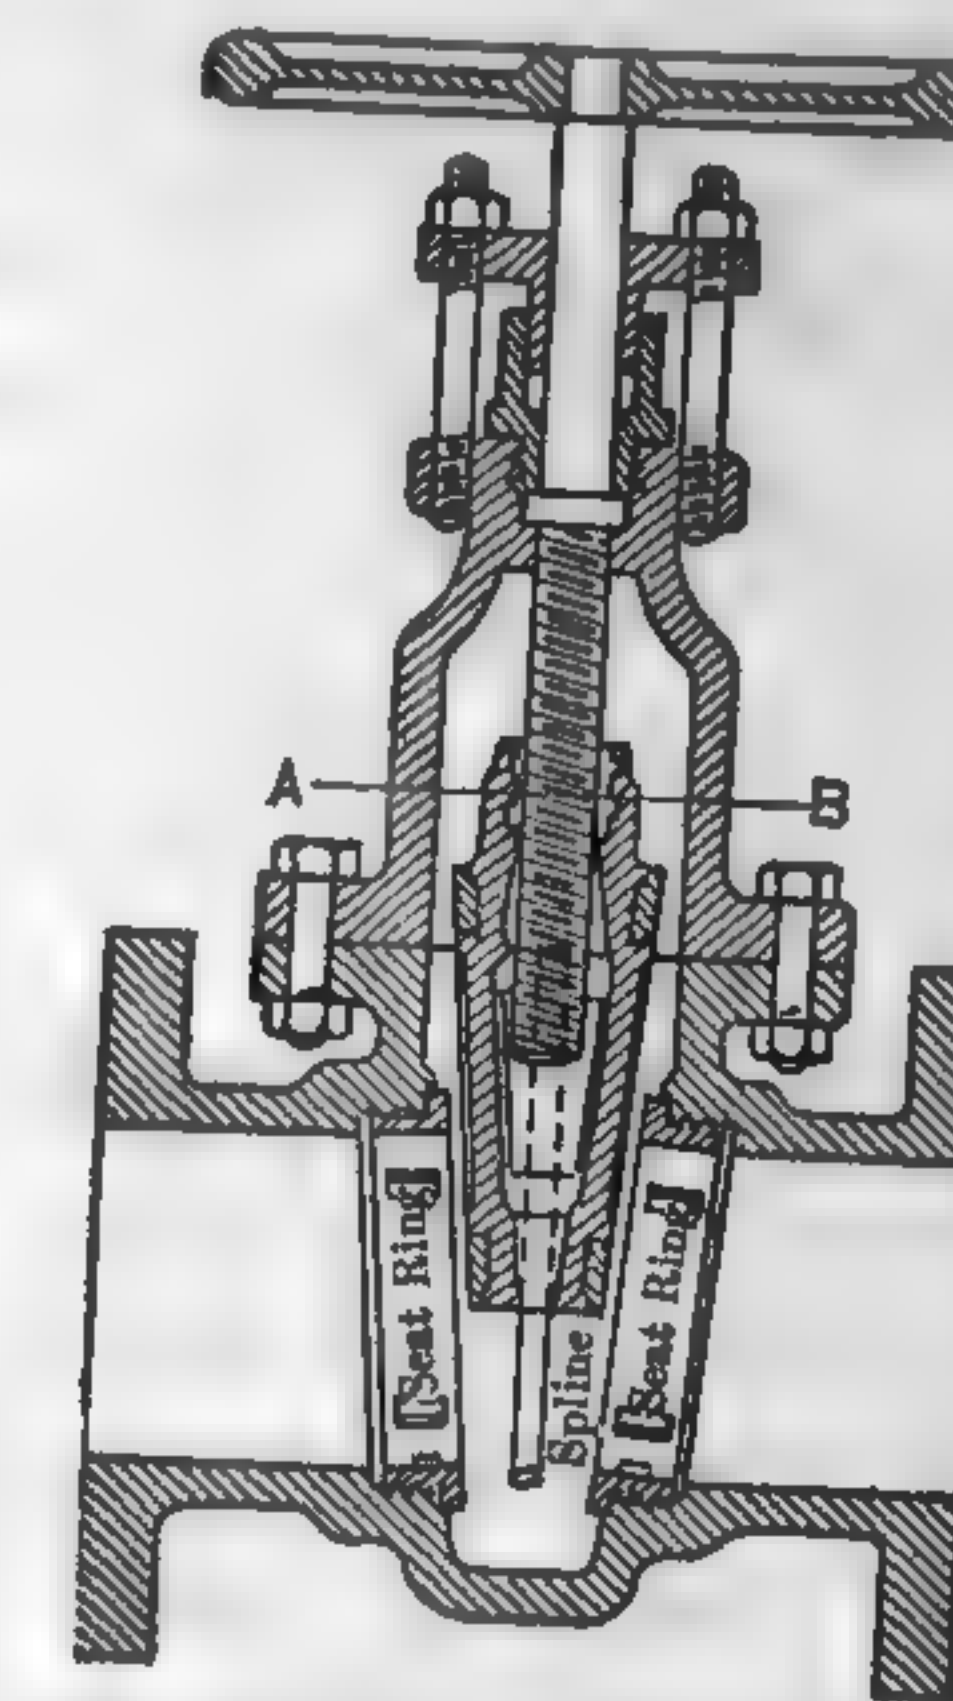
Typical Gate Valve, Solid-wedge, Bolt-top, Inside-screw.
